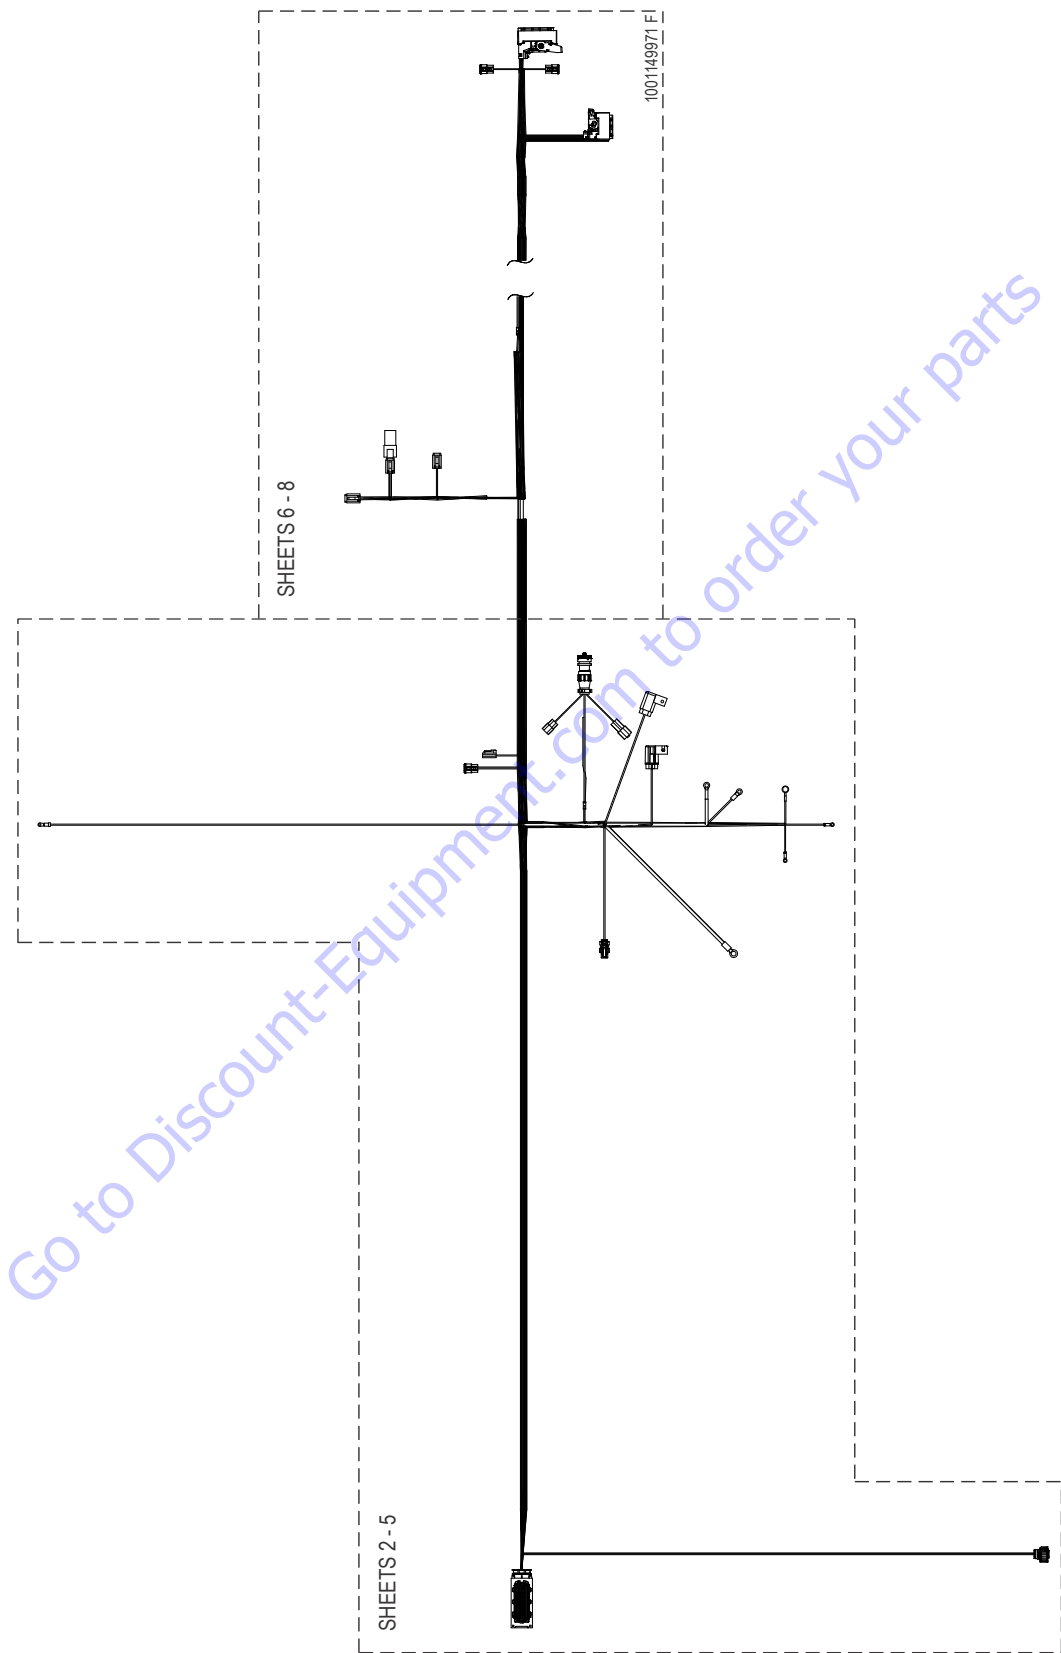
Engine T4I Harness - Sheet 1 of 9
